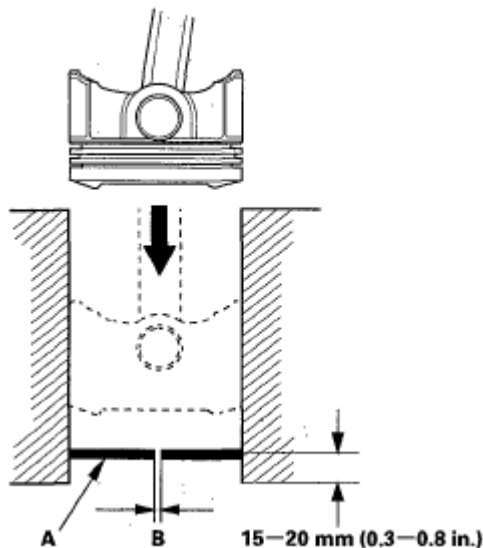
Pushing Ring Into Cylinder Bore 15-20 mm (0.6-0.8 in.) From Bottom
